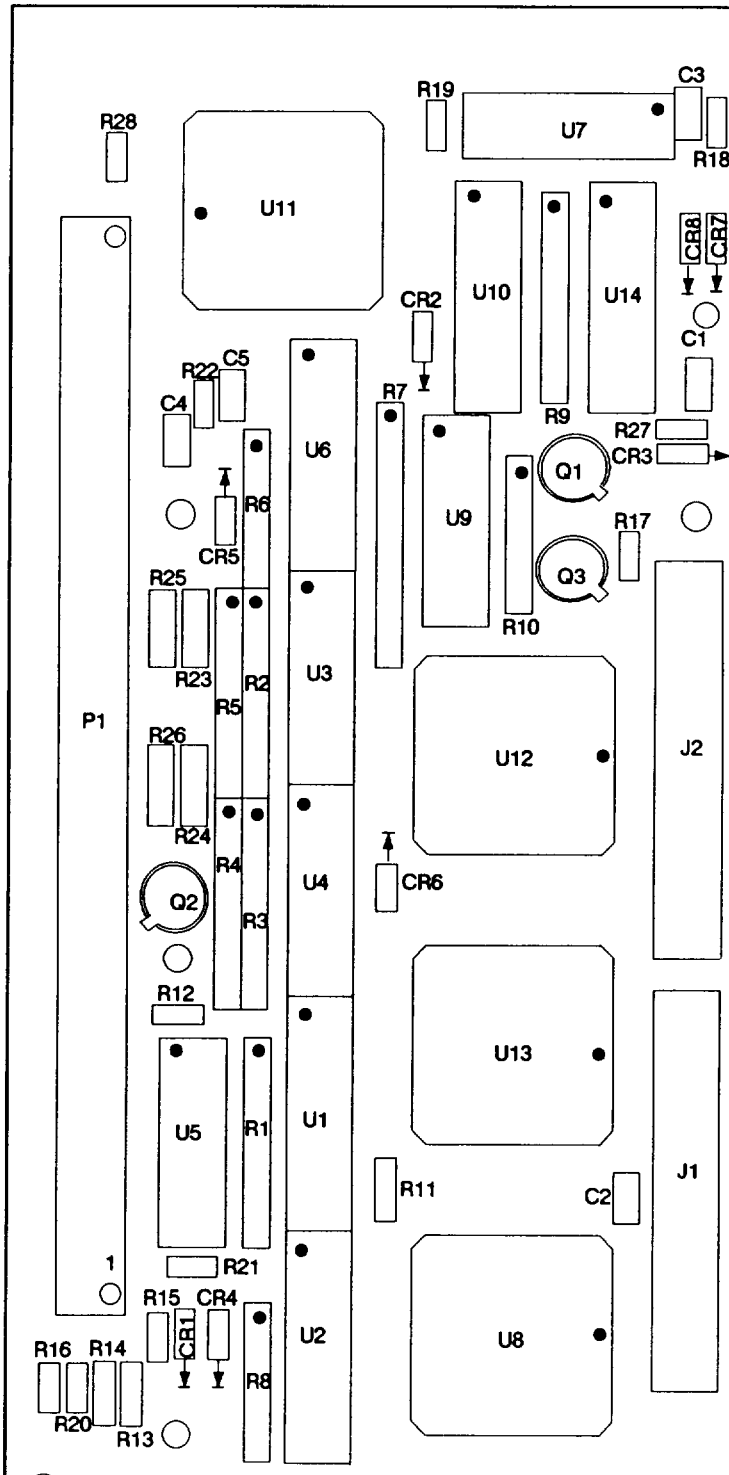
Electronic Components Assembly-Fill Routing (1A15) A3018890-1 (Sheet 2 of 3)
